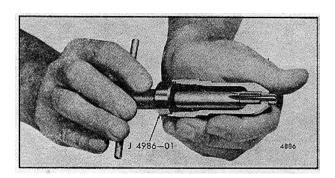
Cleaning Injector Nut Spray Tip Seat using Tool J 4986-01
